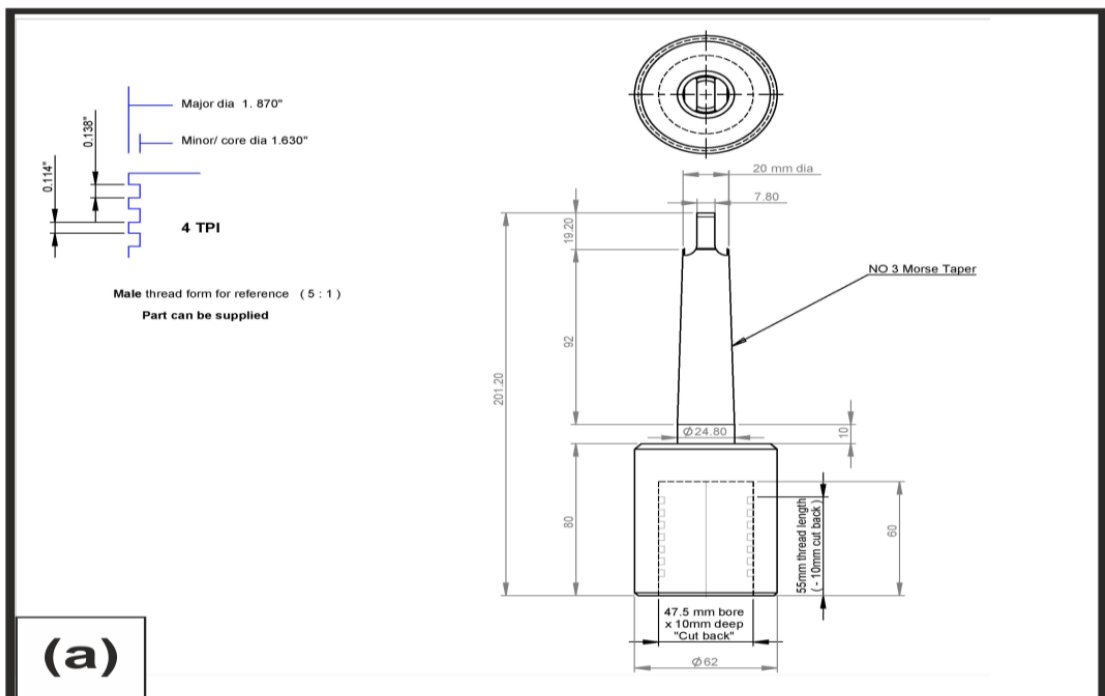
(a) Designed bit holder and (b) Sample holder at the top and support box (next page).
